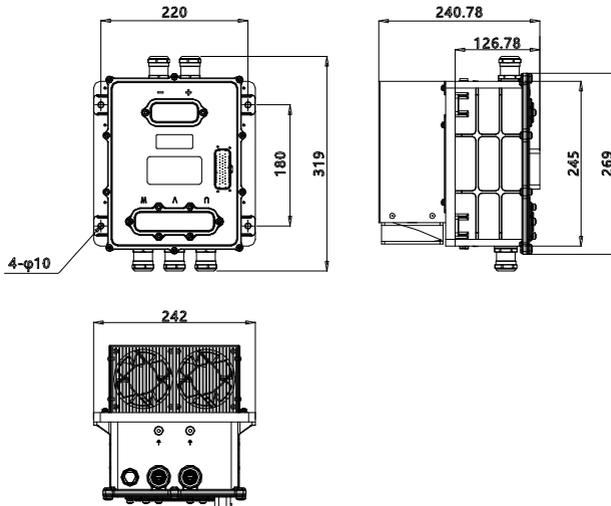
Outline, mounting dimensions of L640 (air cooling)
